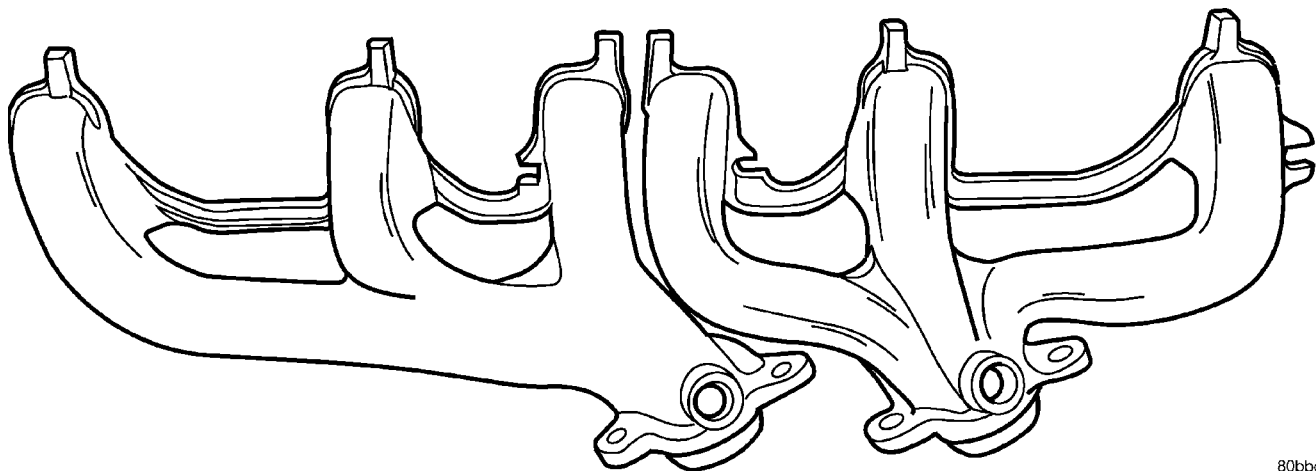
EXHAUST MANIFOLDS 4.0L ENGINE
